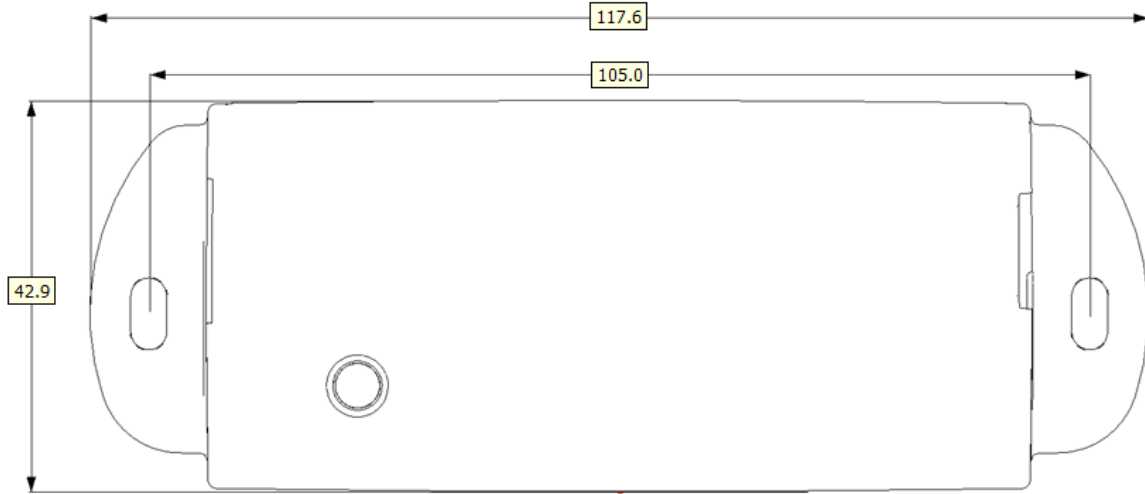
LDSBUS Thermocouple Sensor Adapter Dimension – Top View
